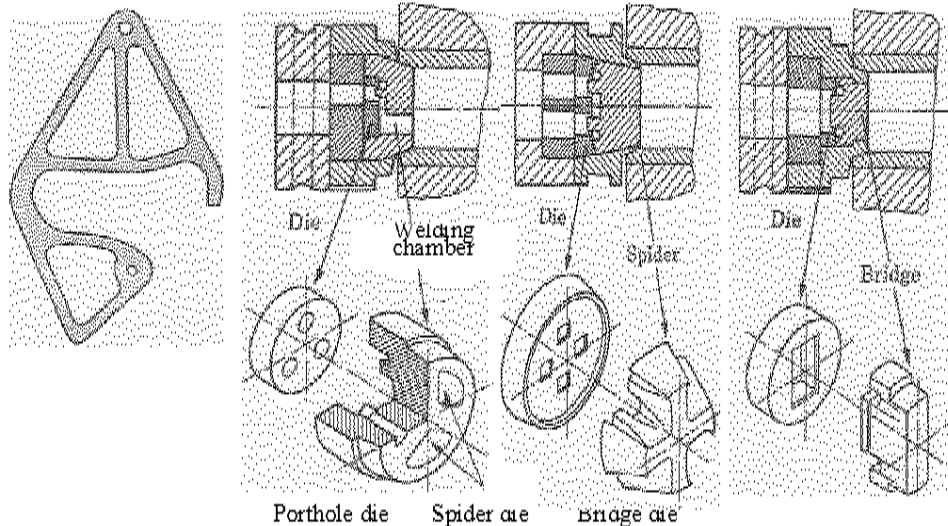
a - Extruded aluminum ladder lock is 8 mm thick and is sawed from the extrusion. b - components of various dies for extruding intricate hollow shapes
